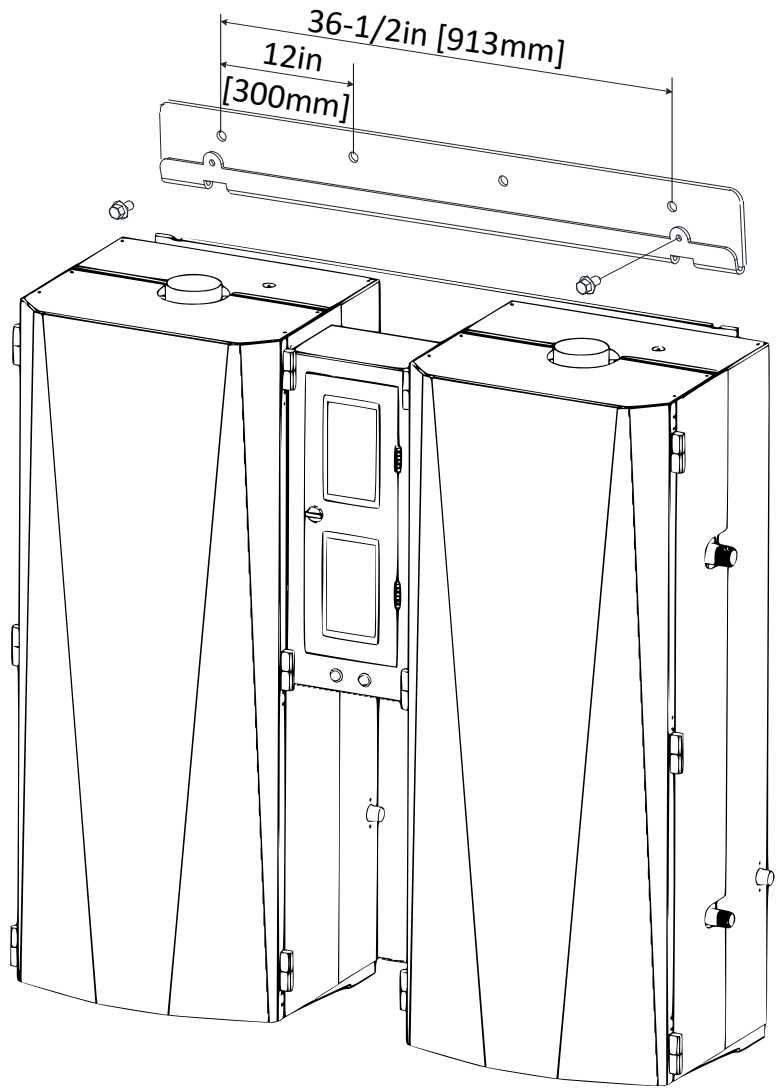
2 modules mounting bracket (ISE440 & 600)
